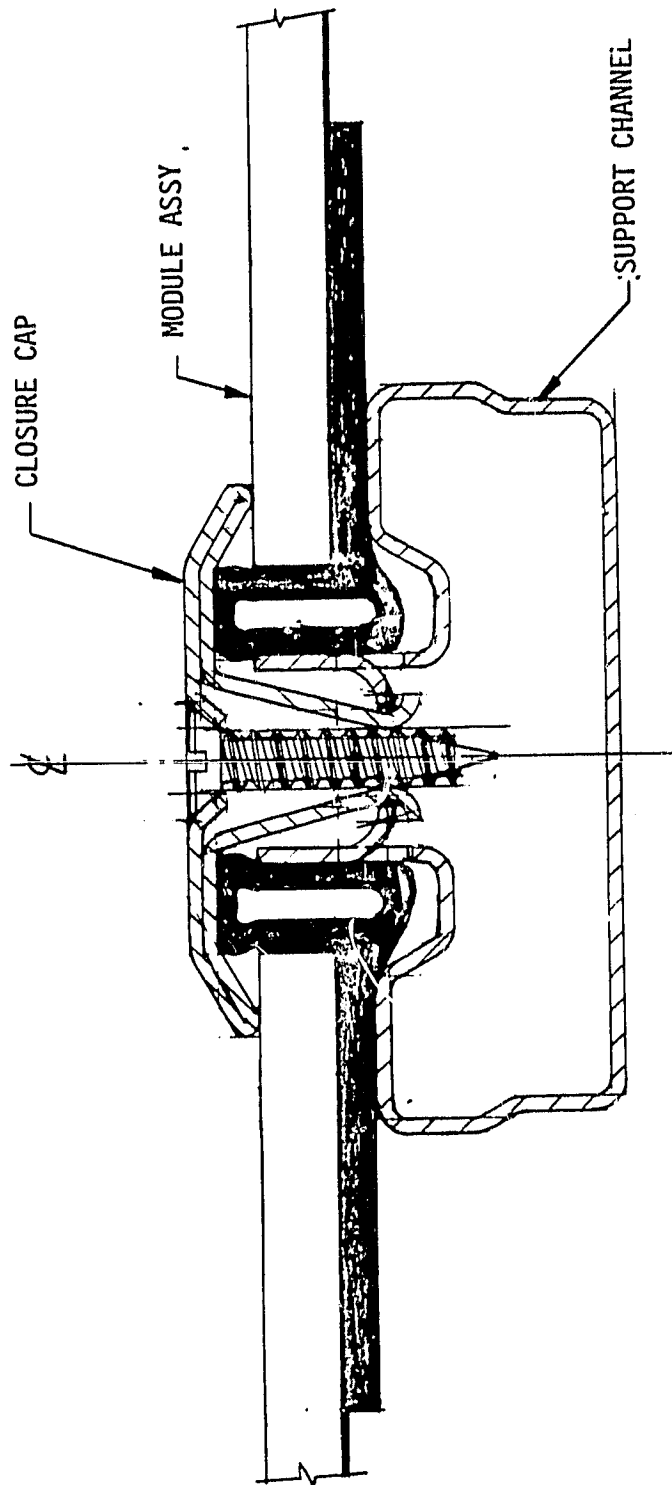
Sectional View Through Support Channel Showing Clamping Method
